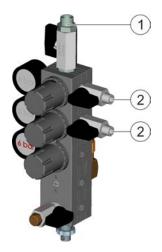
Compressed air inlet fitting (optional, 3 controllers)
